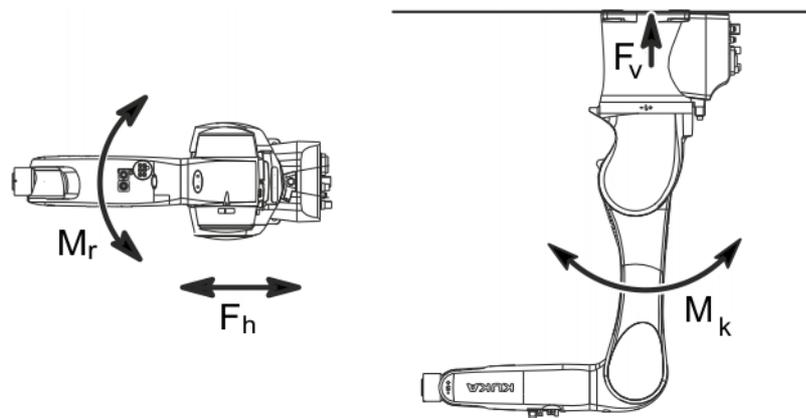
Loads acting on the foundation, ceiling mounting
